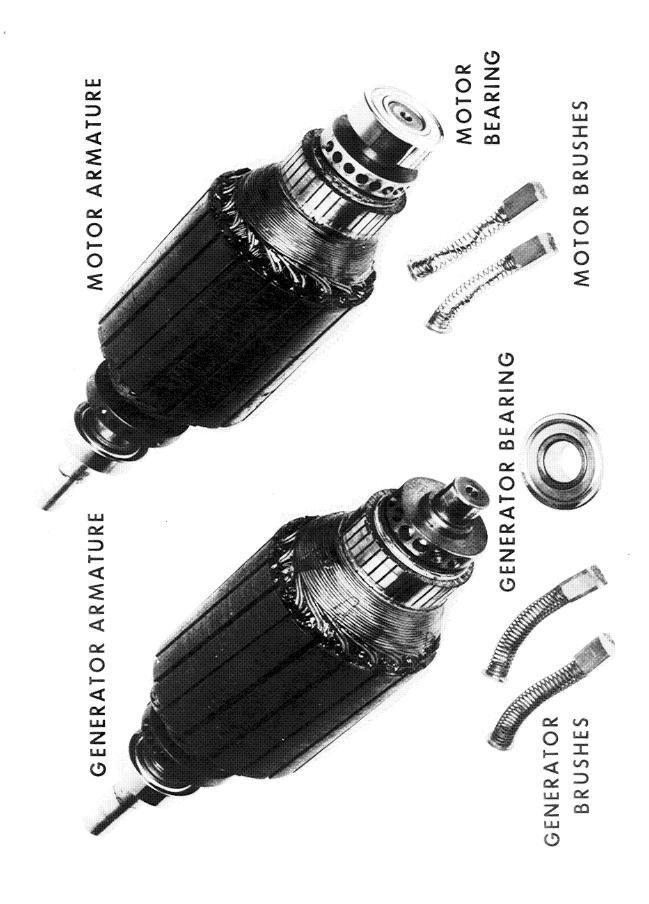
MOTOR AND GENERATOR ARMATURES, BRUSHES, AND BEARINGS AT COMPLETION OF TEST THREE
